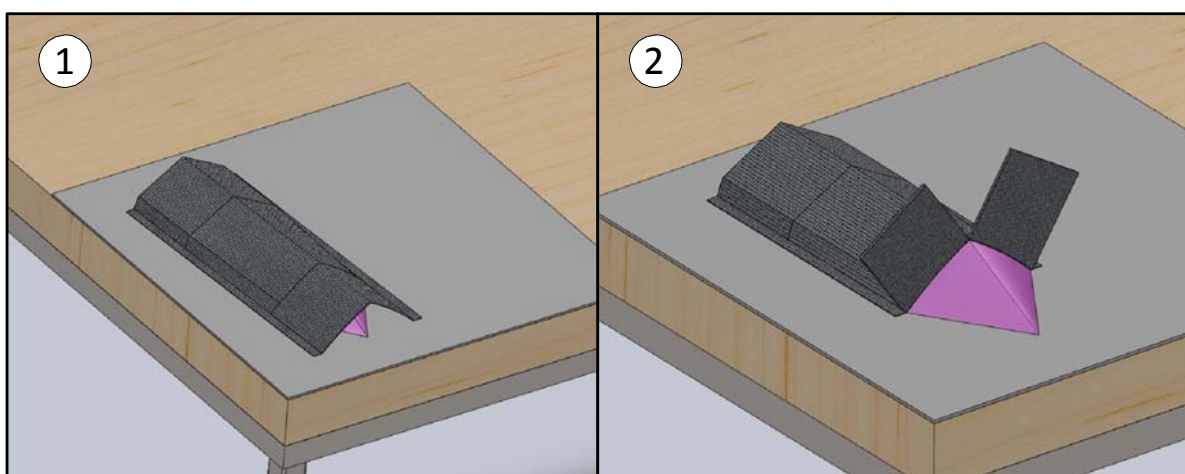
Preparing the bow- (1) Fold the matting over the plug. (2) Cut the matting down the center of the bow to make two flaps.
